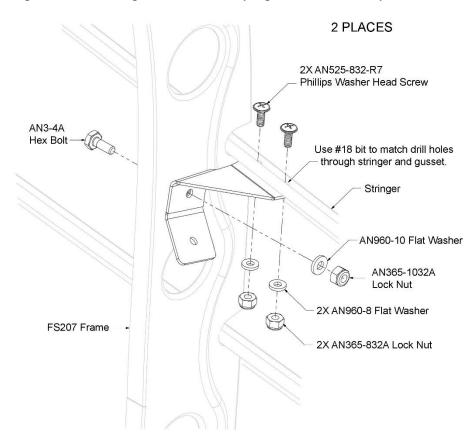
Attaching Gussets to Frame and Stringers (Right Side Shown)
